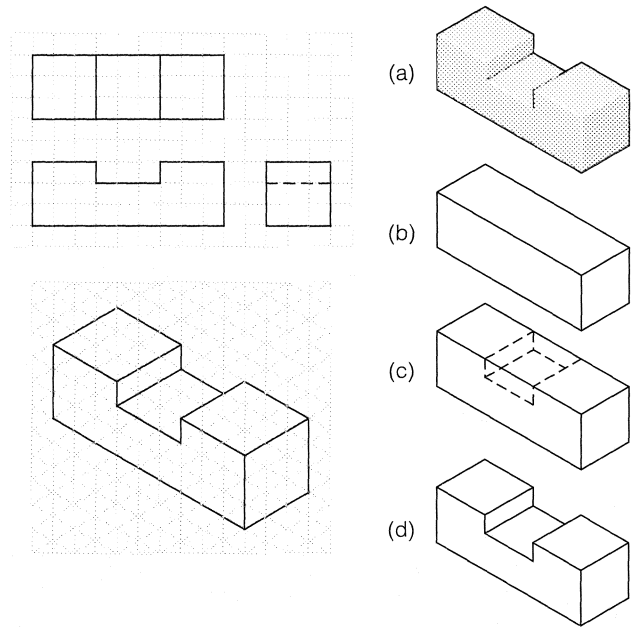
Box Construction and Grids for Isometric Drawings
